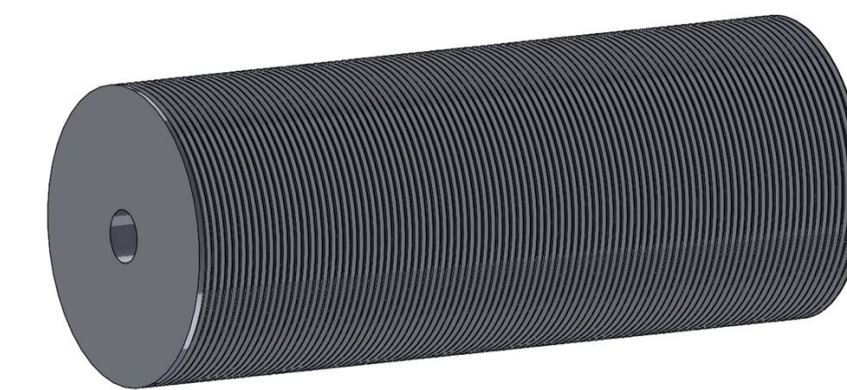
SolidWorks rendering of 3.4V motor axle. Placed on DC motor, where thread catches.
